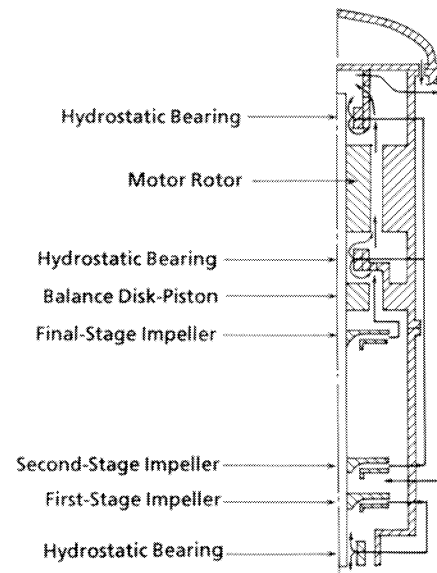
Flow of Bearing Lubrication, Bearing Cooling and Motor Cooling.
